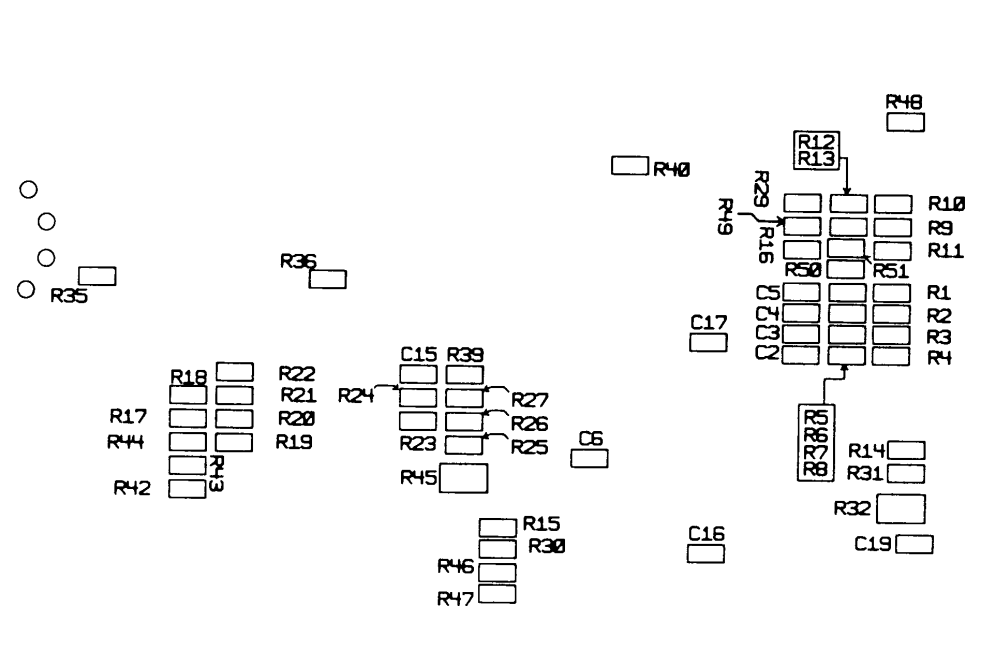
Component Layout - B81310*MAIN (Soldered Side)
